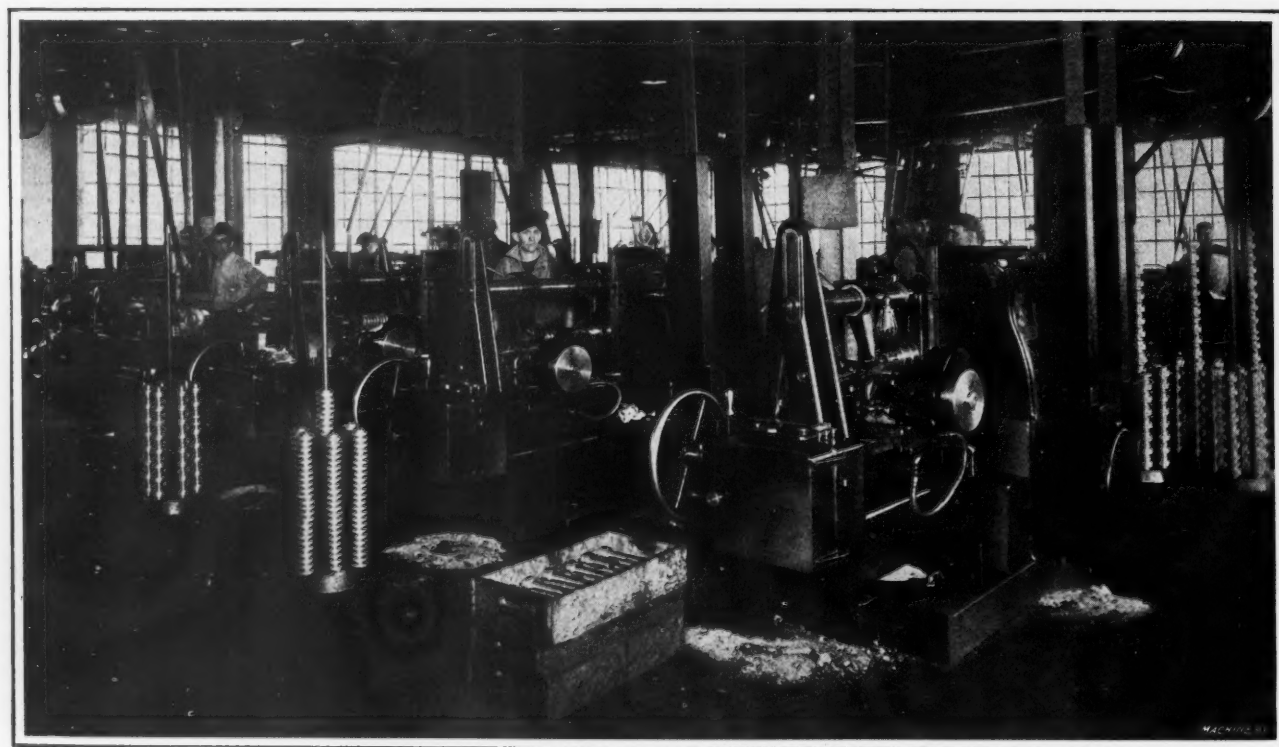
General View of the Shop, showing a Battery of Gear-hobbing Machines
